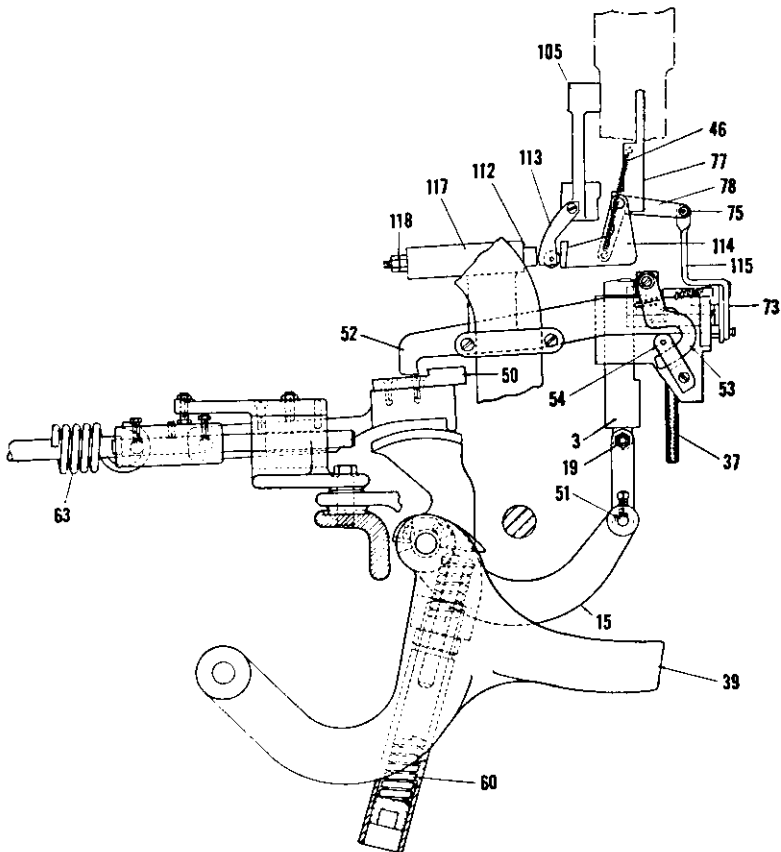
View showing the mechanism for locking control rod, and applying the extra pressure to the vise jaws after the control rod is in locked position.
